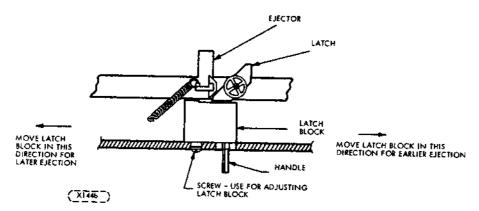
EJECTOR, LATCH AND LATCH BLOCK
